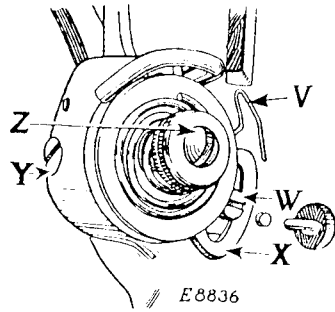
ADJUSTMENT OF THREAD TAKE-UP SPRING
